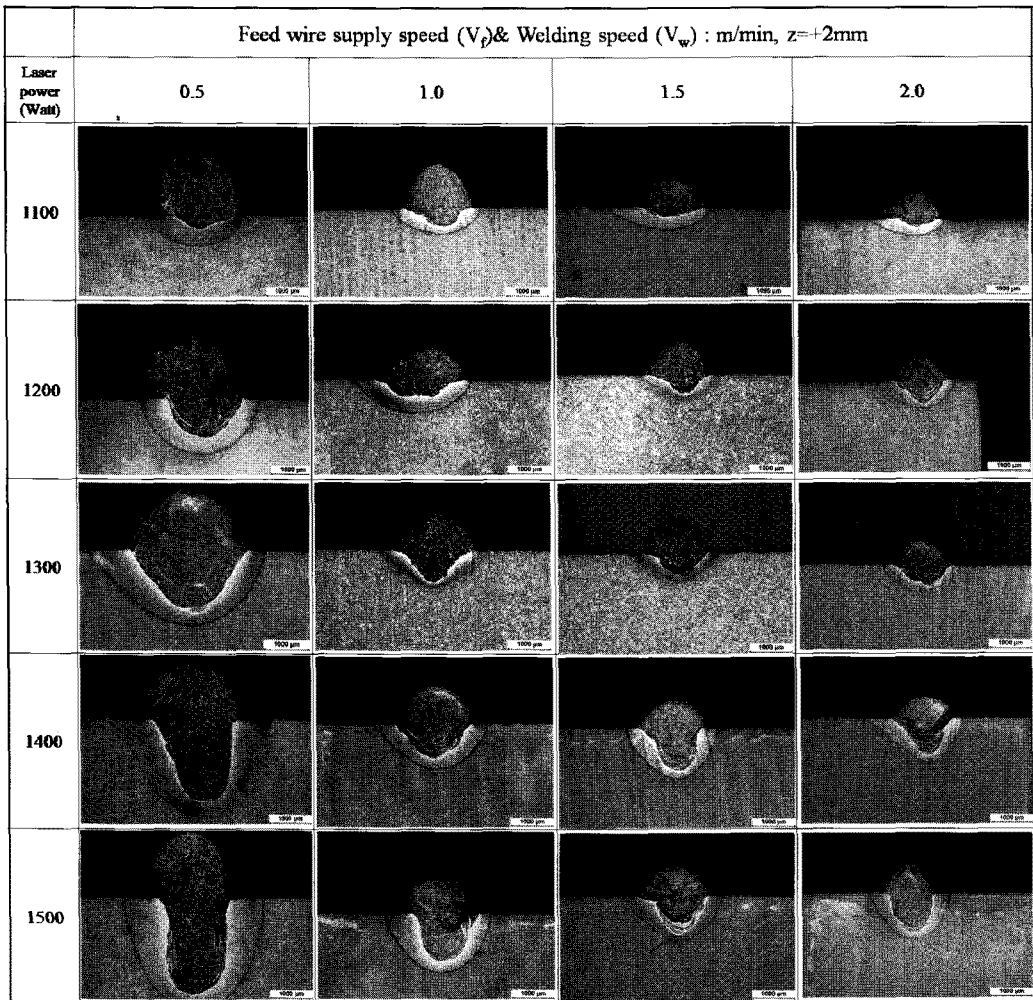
Cross section of weld zone after laser repair welding
